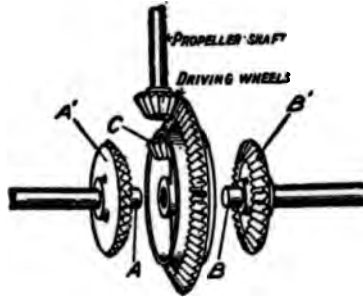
Fig. VII.—Complete Differential showing bevel, drive and pulley.
